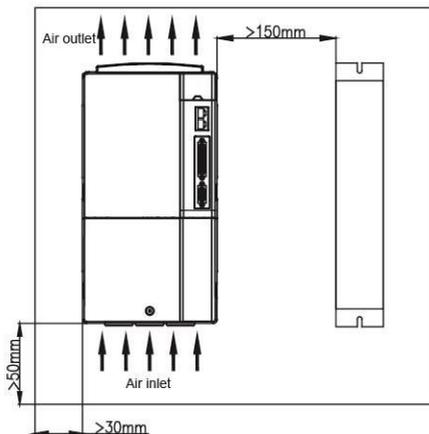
MH860-018/025/032/038/043/060/070/092/115 drive and braking resistor layout (mm)
